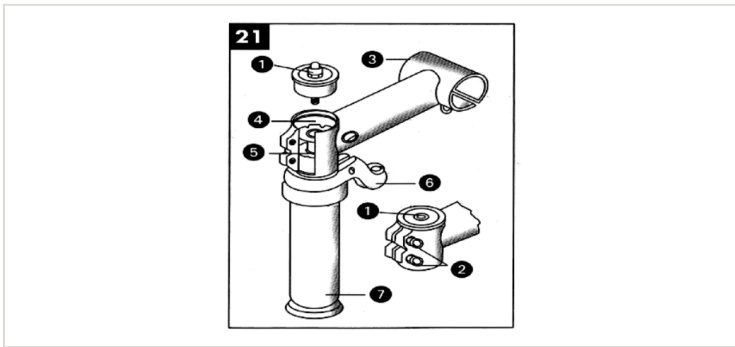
A-head: 1 = 2.5 Nm · 2 = 13.2 Nm · 3 stem · 4 steerer tube · 5 star nut · 6 cable stop · 7 head tube
